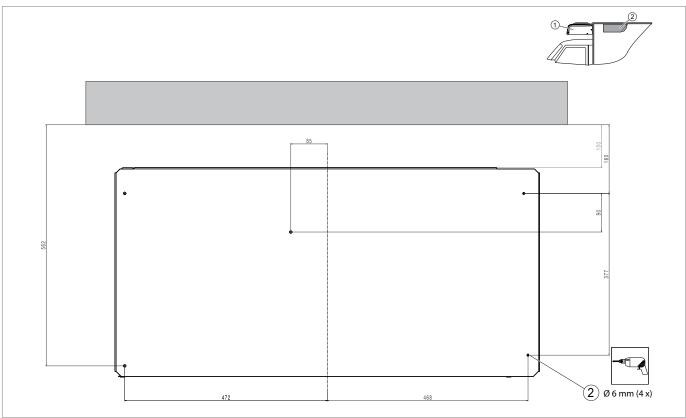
Frigo Top 36 (R134a / R452A) 38, evaporator mount
